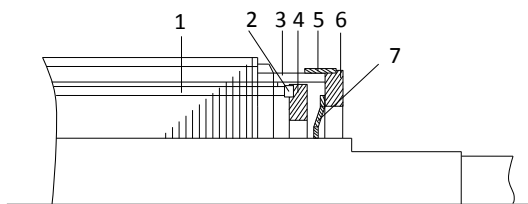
Rotor optimized structure. 1. lower bar; 2. Bushing; 3. upper guide bar; 4. lower end plate; 5. rotor sheath; 6. upper end plate; 7. Bracket
